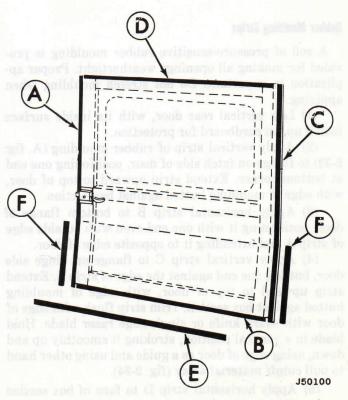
Vertical Rear Door Rubber Moulding Strips
